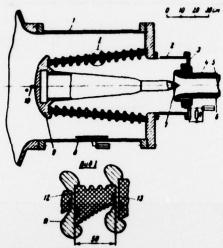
Accelerator tube and exhaust device. 1 - housing; 2 - vacuum chamber; 3 - Rogowski loop; 4 - housing of exhaust device; 5 - exhaust window; 6 - solenoid; 7 - emitter; 8 - voltage sensor on the tube; 9 - high-voltage electrode of the tube; 10 - tip; 11 - electrode of the tube; 12 - insulator; 13 - packing.
